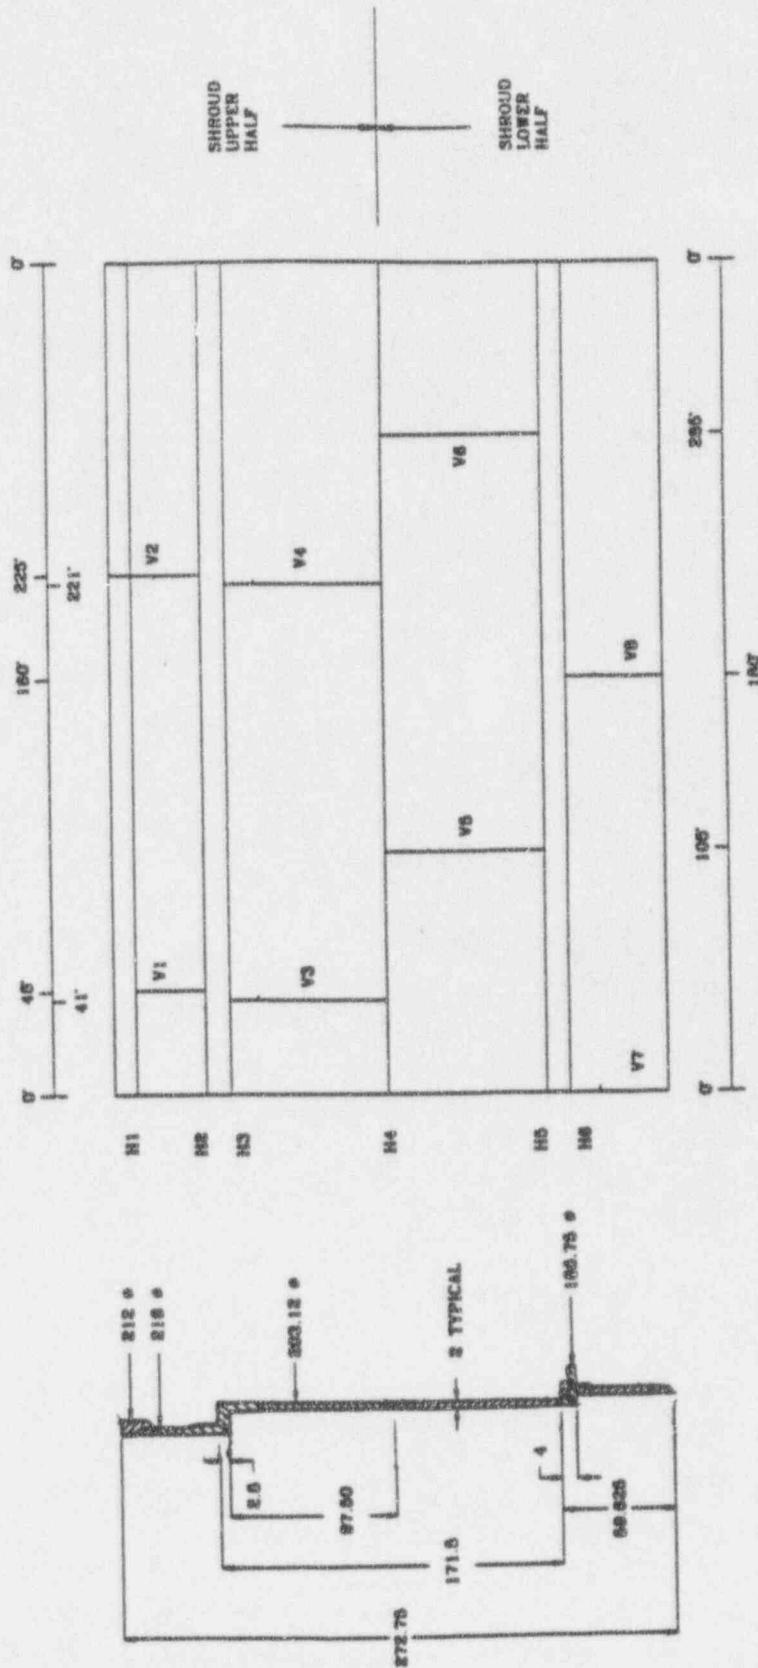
Schematic Showing Typical Welds in Core Shroud (Example 2)
